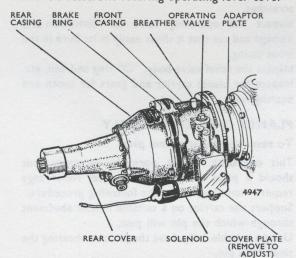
Side view of unit (Later units have an external balance pipe and a plug replaces the breather)
